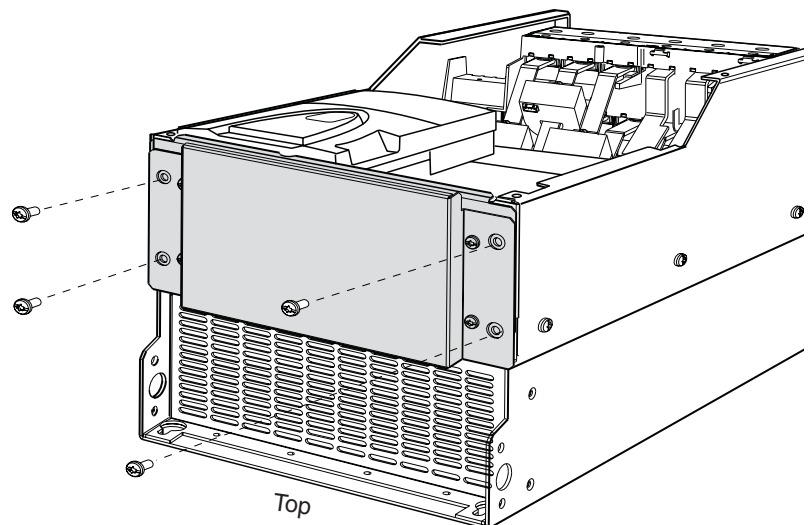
Front Cover Removal (Frame Size 8 Shown)
